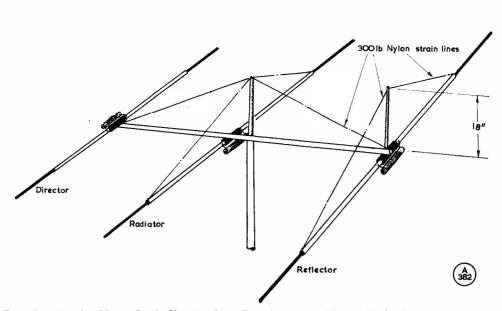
General constructional layout for the 20-metre three-element compressed beam, showing how nylon strain lines are used to keep the structure mechanically in square, while permitting the necessary resilience under high windage conditions.
